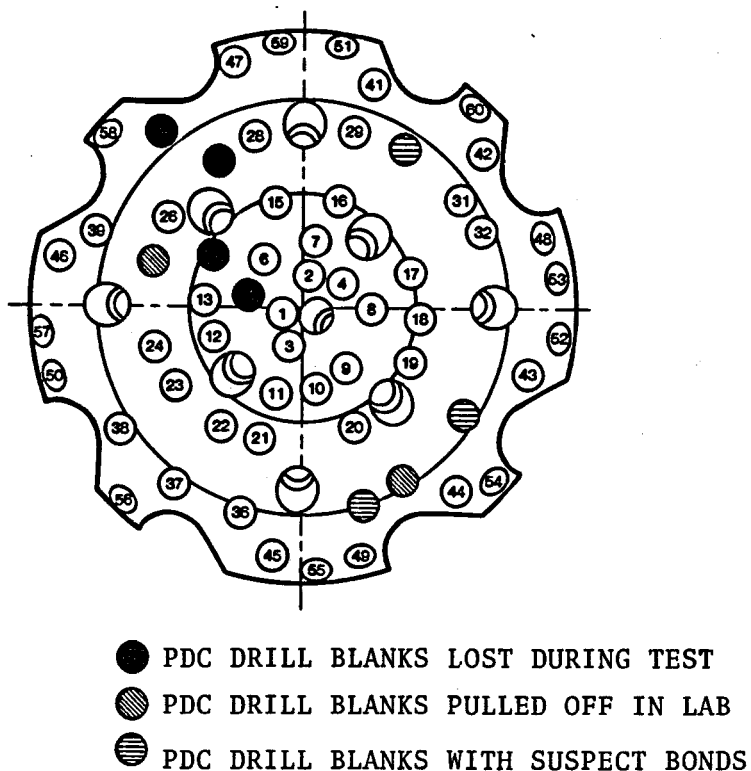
Location of cutters on Strata Bit Corp. drill bit lost or damaged during the turbine test at the Geysers.
